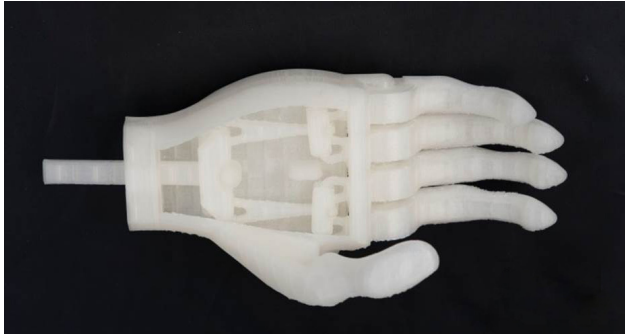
Prosthetic hand with a non-assembly mechanism. Although the mechanism has large clearances, the joints automatically align because of the driving force [19].
